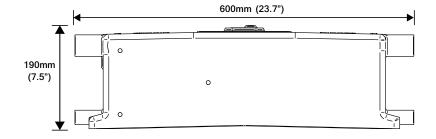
Typical Grey Waste Tank Installation in Multi Drain Grey Waste System
